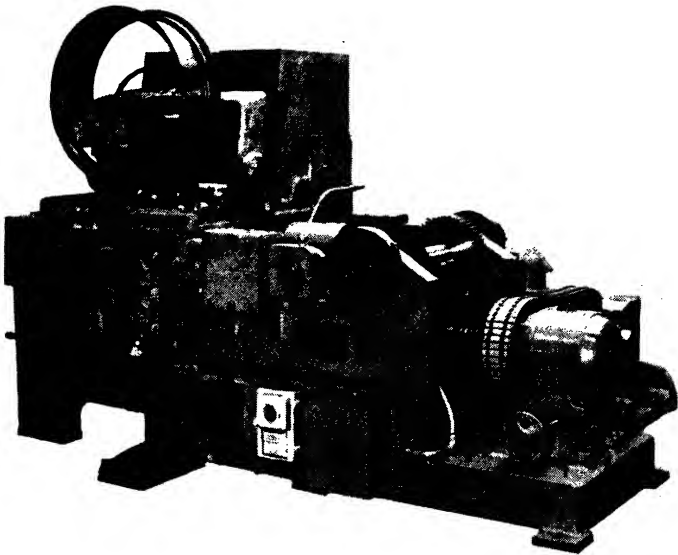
AUTOMATIC FLASH BUTT-WELDING MACHINE
